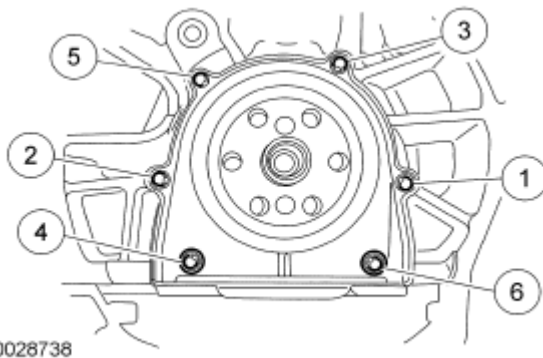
Identifying Crankshaft Rear Oil Seal With Retainer Plate
